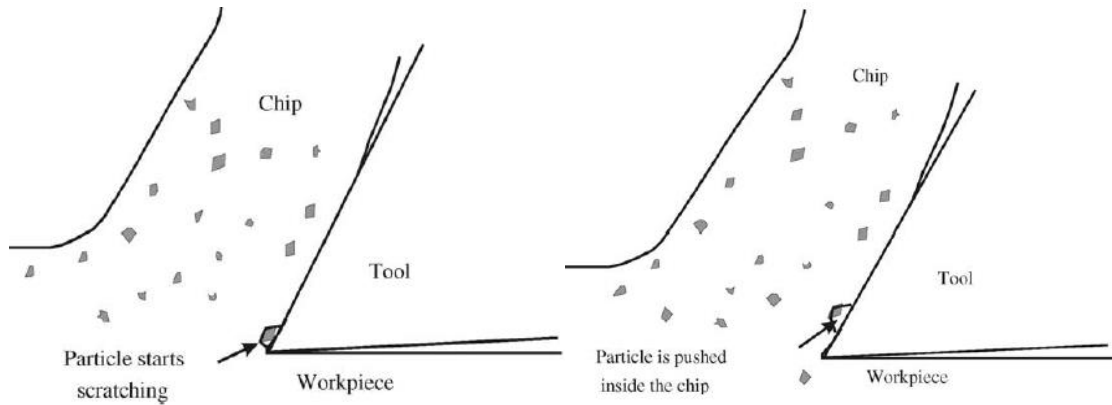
Machining of aluminium/aluminium oxide particulate composite [95]
